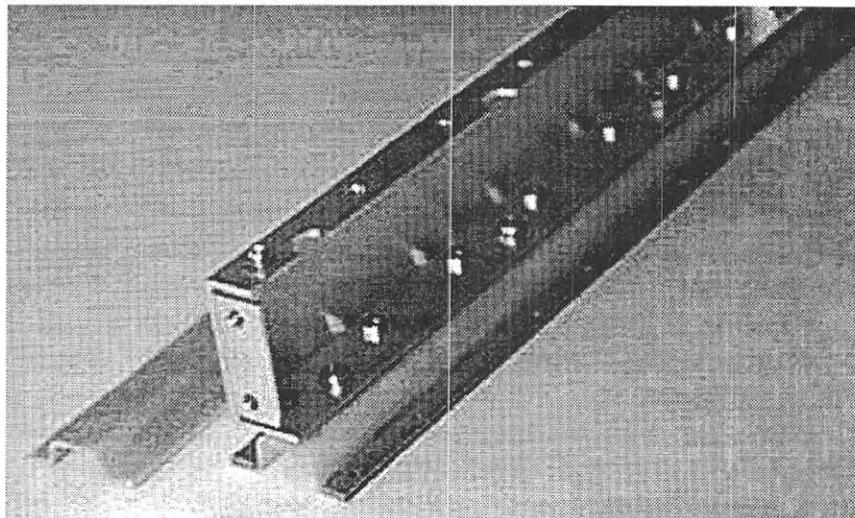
P3D Module Mounting Rail with Module Side Attached (Right), P3B/C Fiberglass-Epoxy Casting for Module Mounting Rail (Left).
